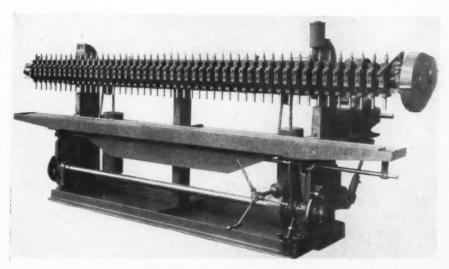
Majority of parts on this drill are arc welded
